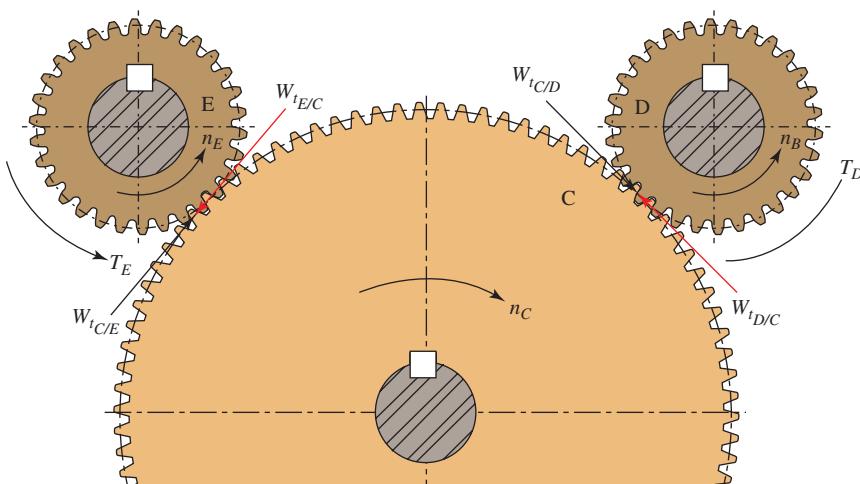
Torques and tangential gear force shown on gears C, D, and E
